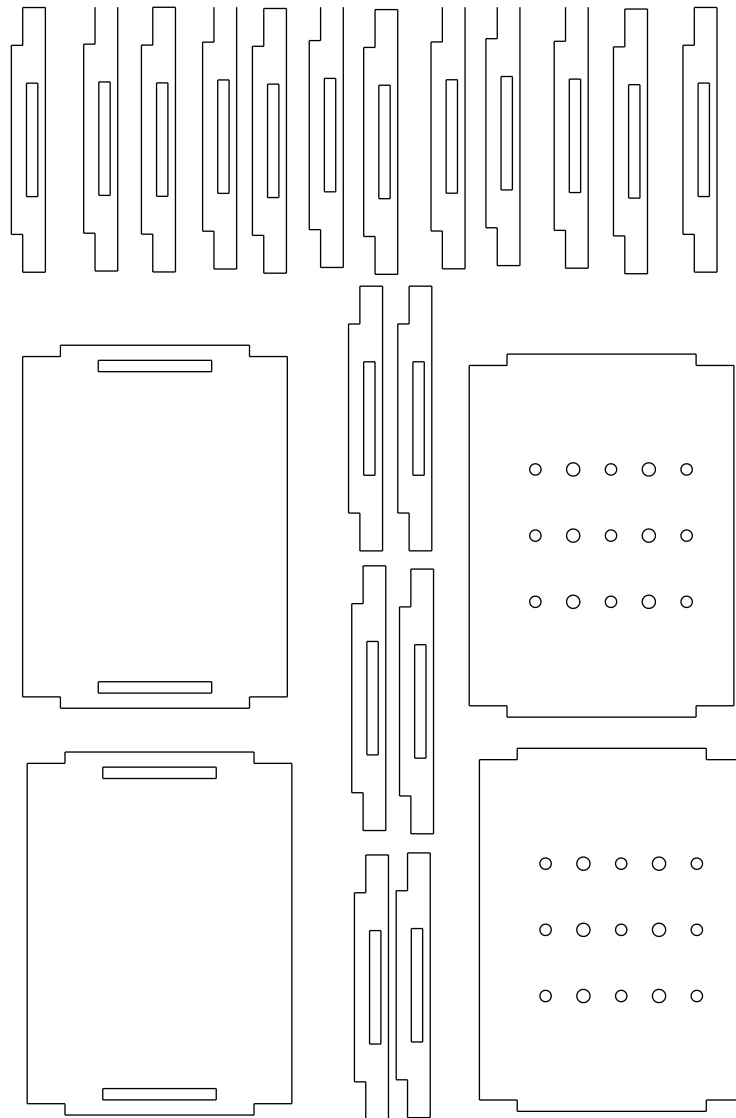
drawing for 1st iteration 1mm thick parts, scale 1:2
